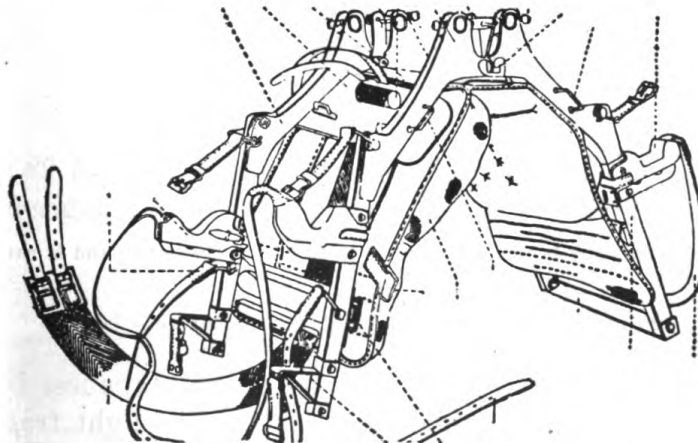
Cavalry pack saddle (heavy machine-gun pack).
